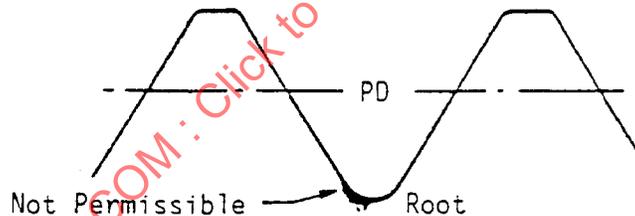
ROOT DEFECTS, ROLLED THREAD
